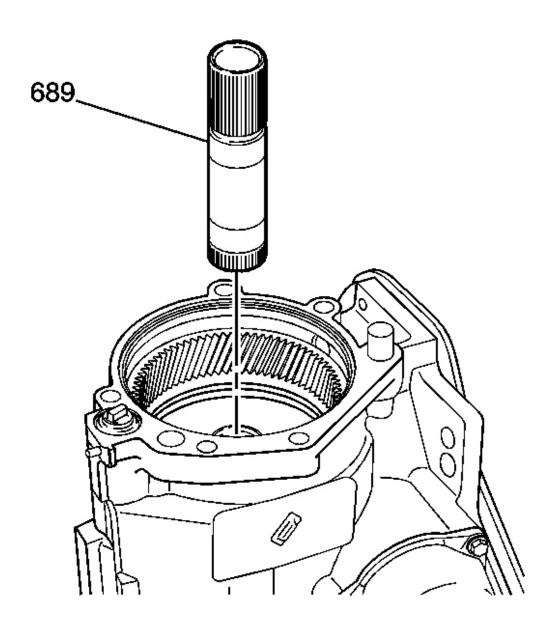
Identifying Final Drive Sun Gear Shaft Courtesy of GENERAL MOTORS CORP.
